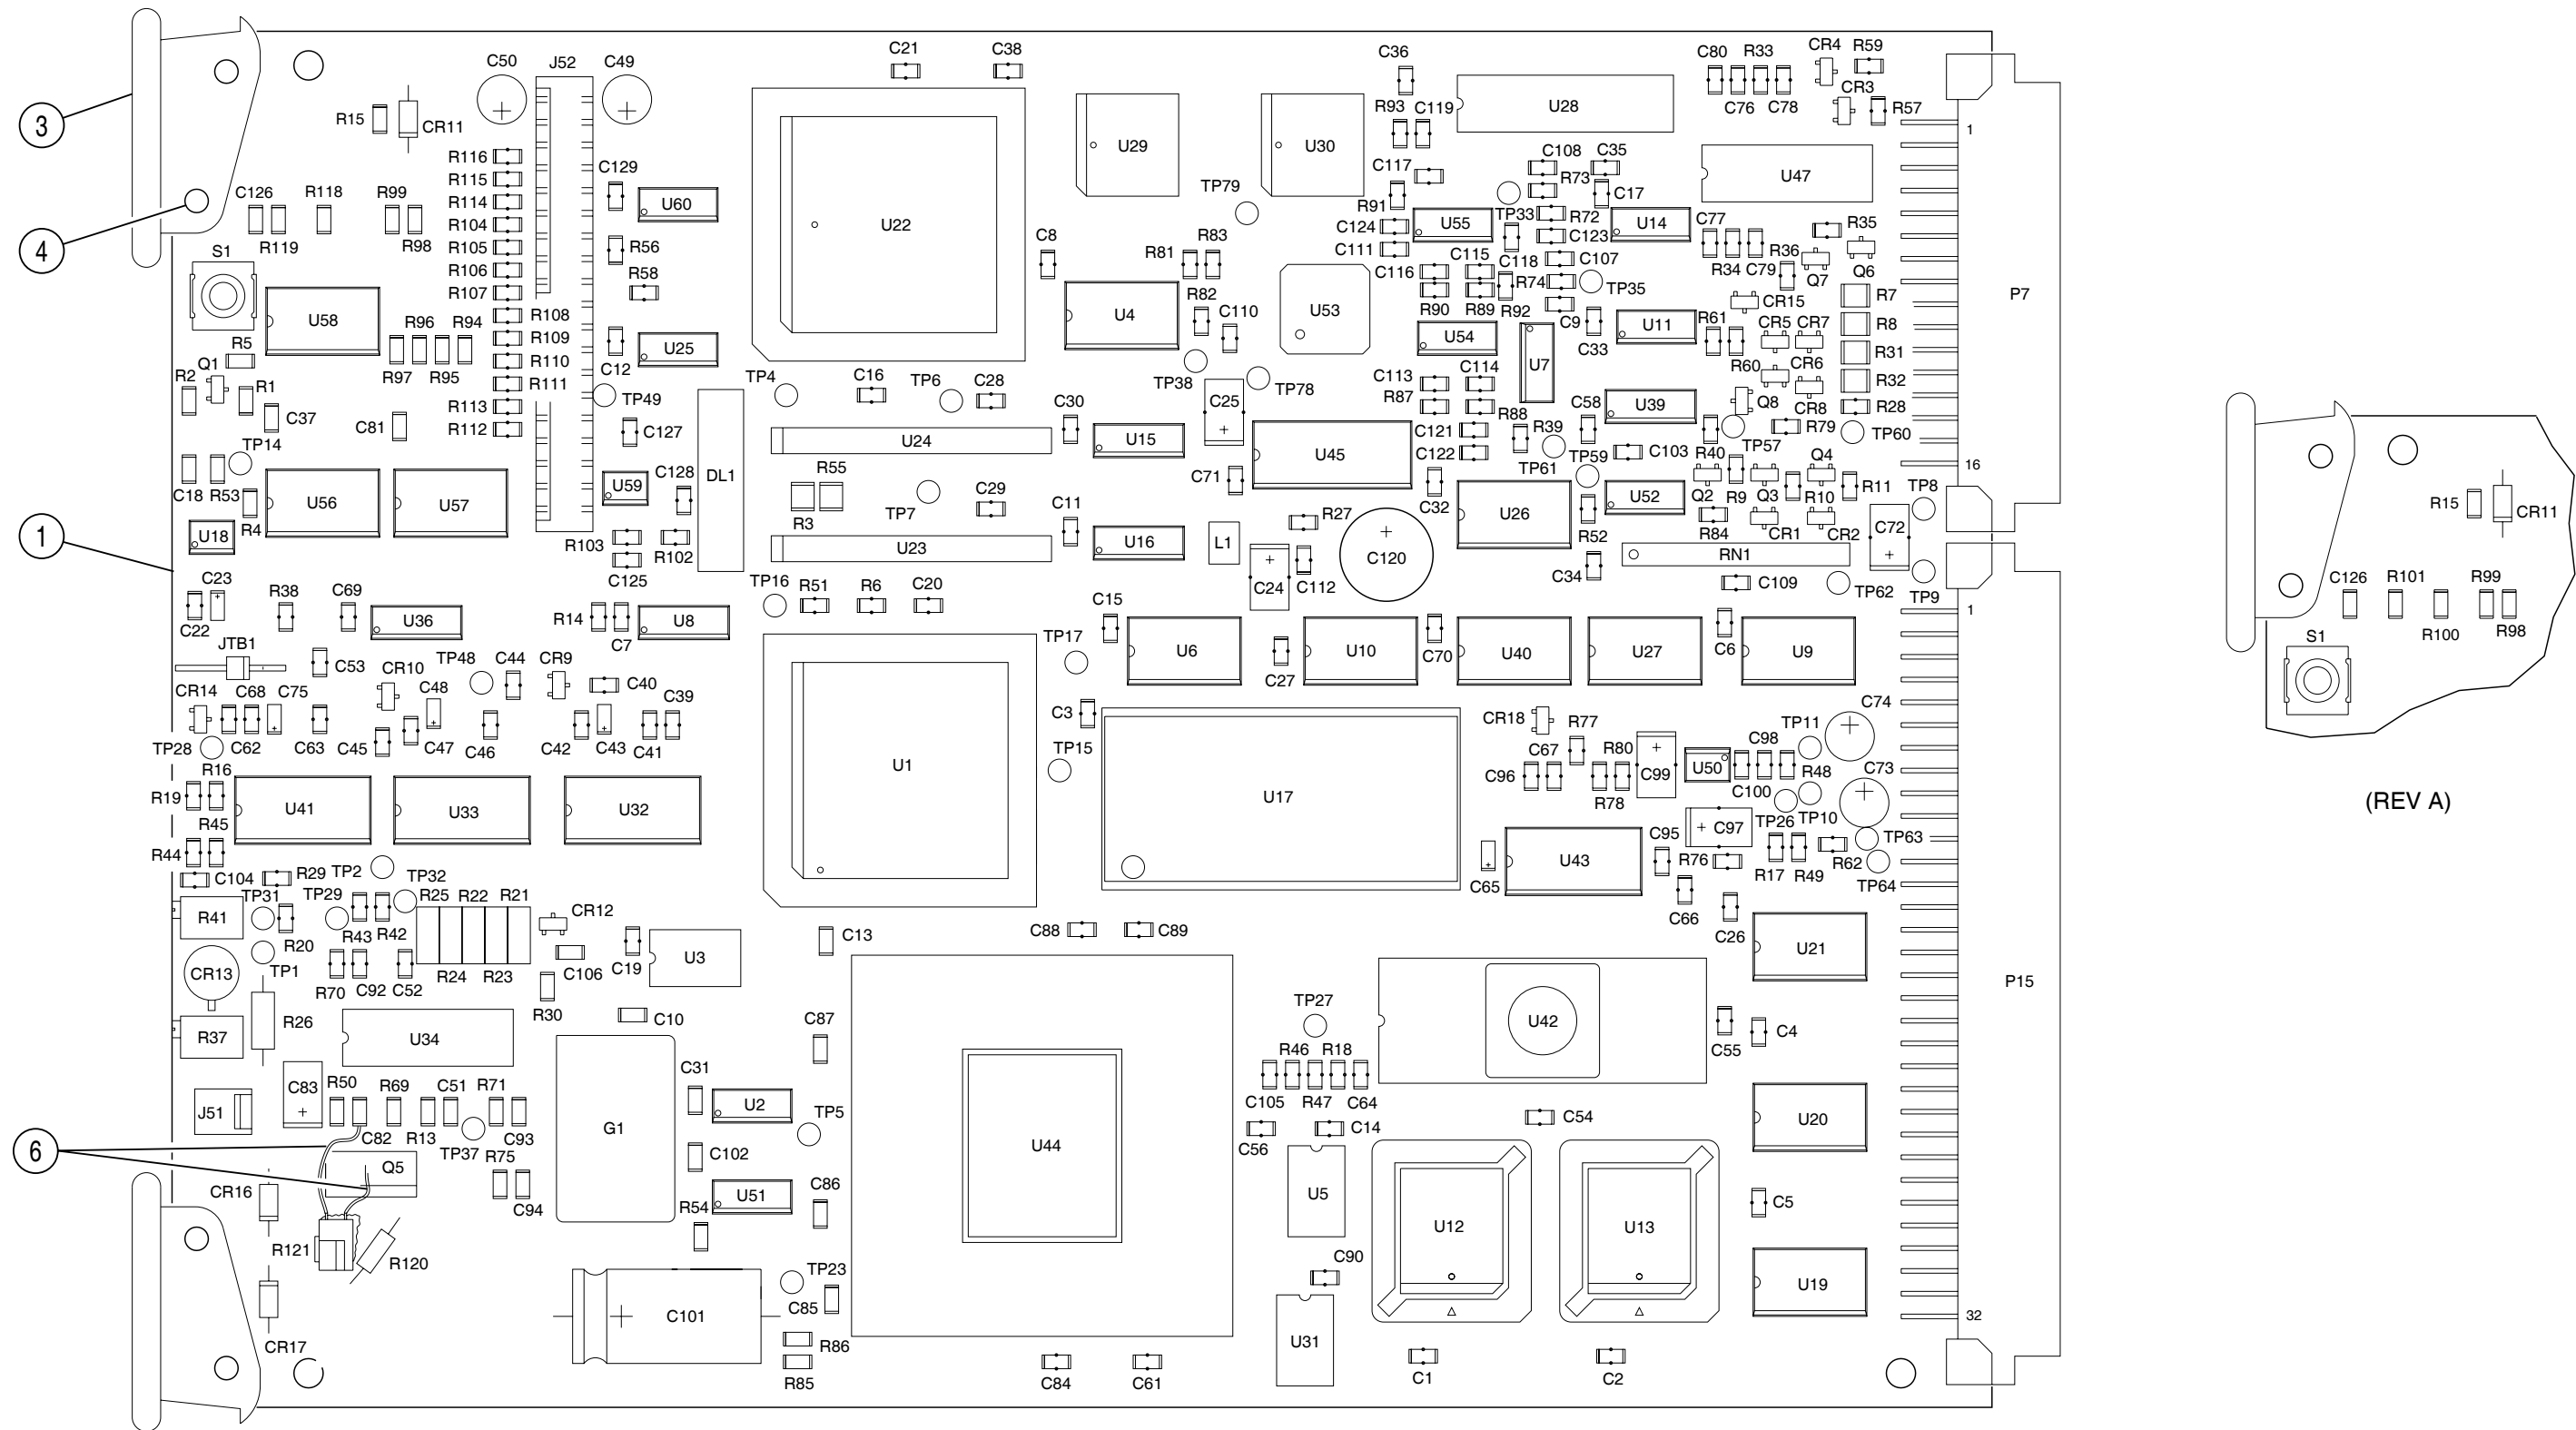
Front Panel Pulse PCB Assy (Sheet 1 of 11)
